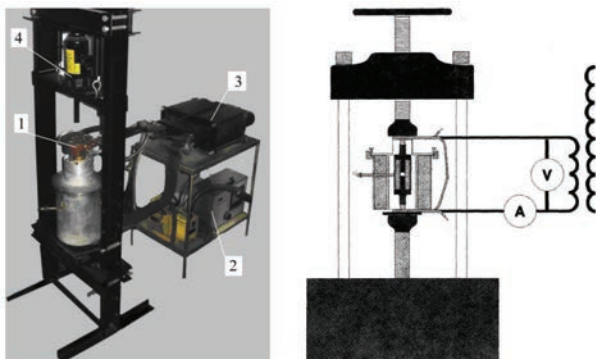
Hot pressing machine: overall view (left) and scheme (right): 1 – hot vacuum pressing chamber, 2 – power supply unit, 3 – transformer TBK-75 with water-cooled current leads, 4 – hydraulic press HLR-12
